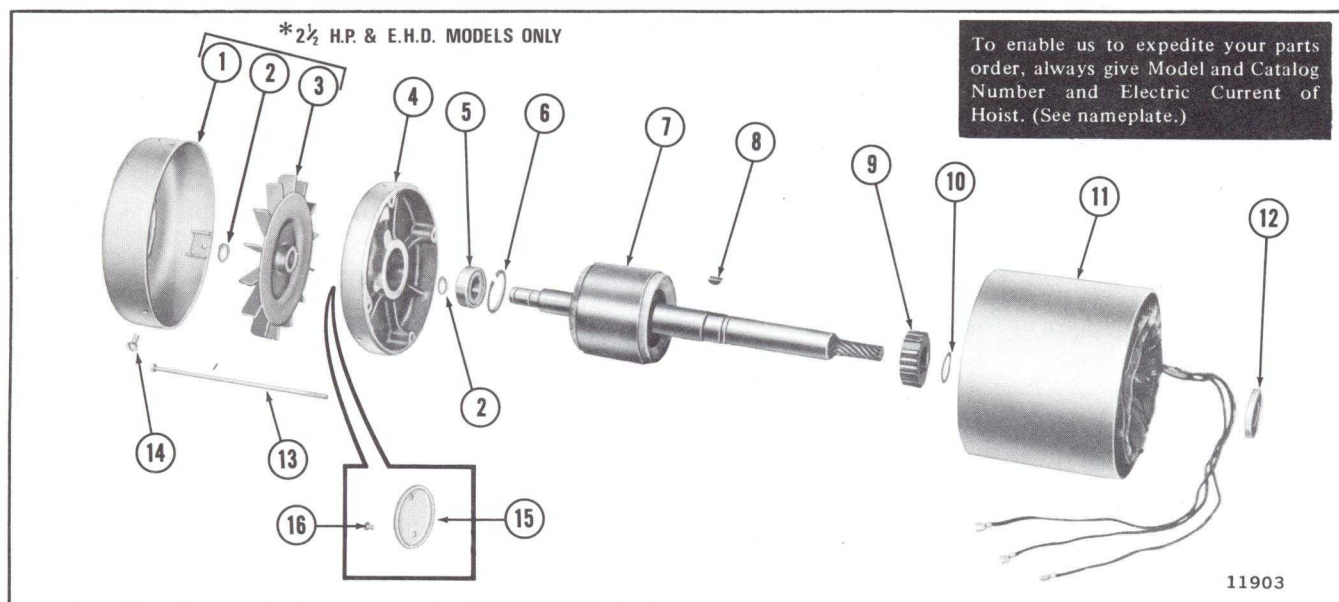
THREE PHASE MOTOR ASSEMBLY — EXPLODED VIEW
